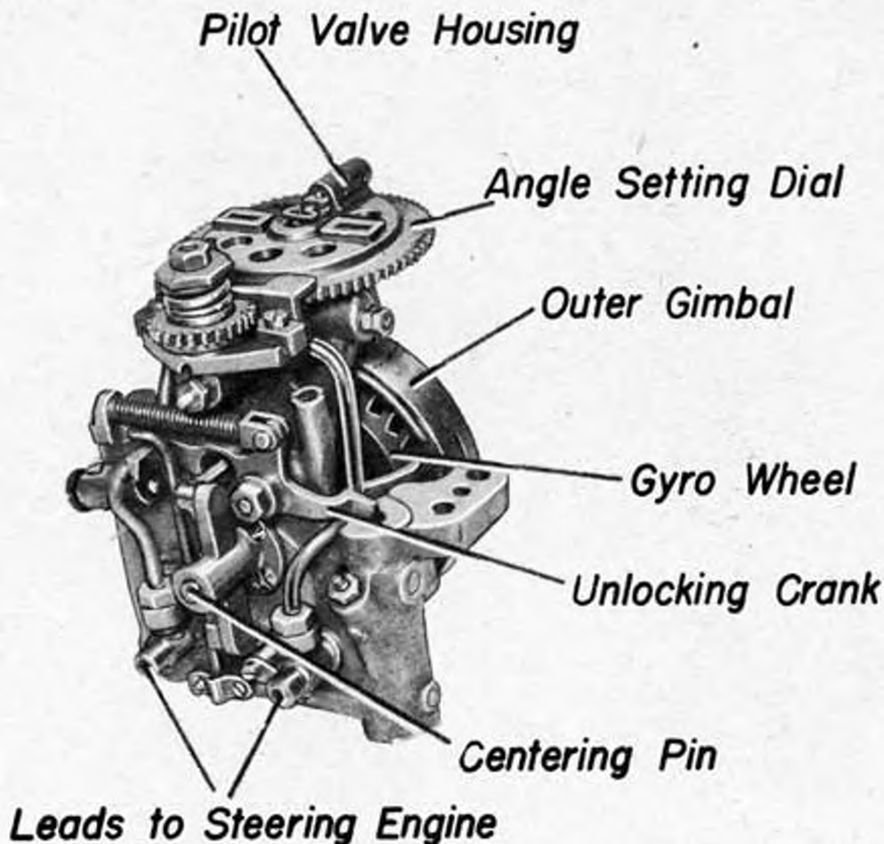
Torpedo Type 91 Mod 1, Gyro Mechanism
